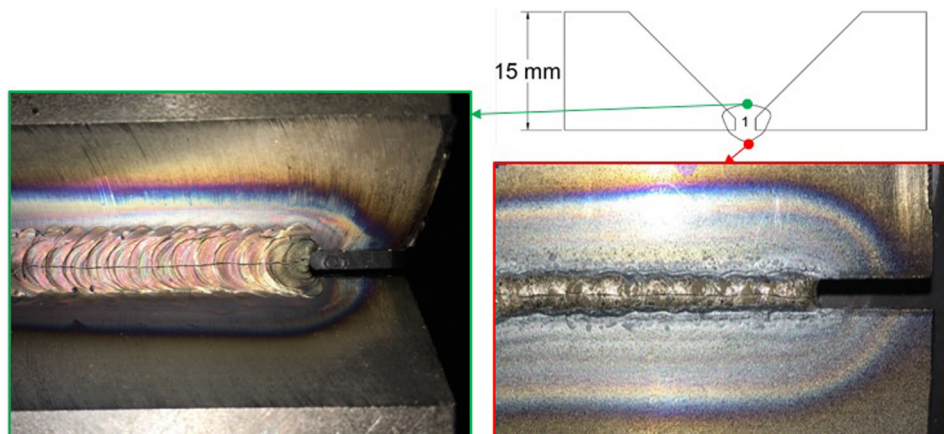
Intentionally manufactured crack in weld (root pass); Sample #3.
